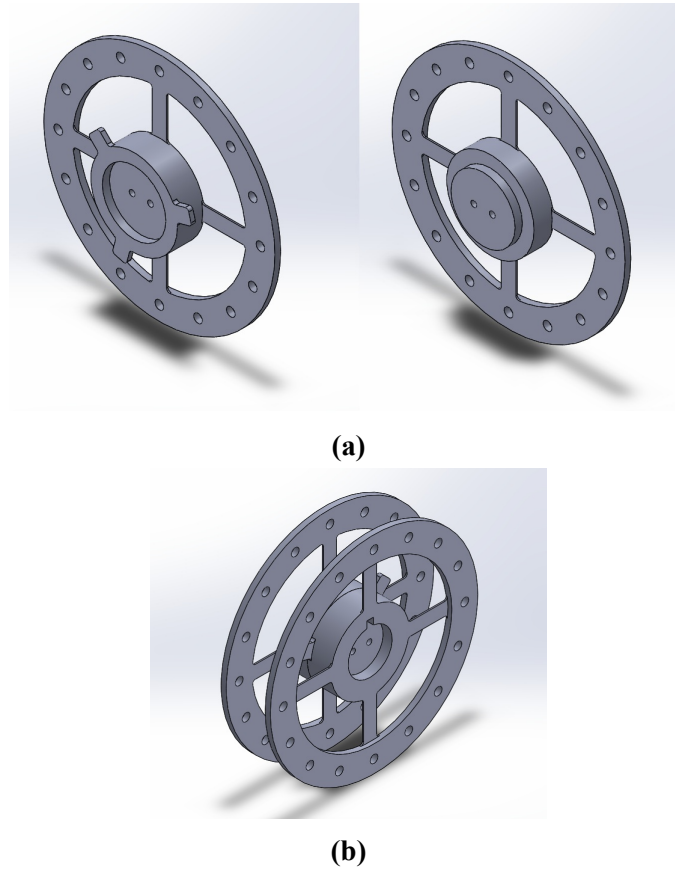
3DCAD representations of the metamaterial design. (a) A single cell produced in two sections which are bolted together. (b) Shows an assembled cell
